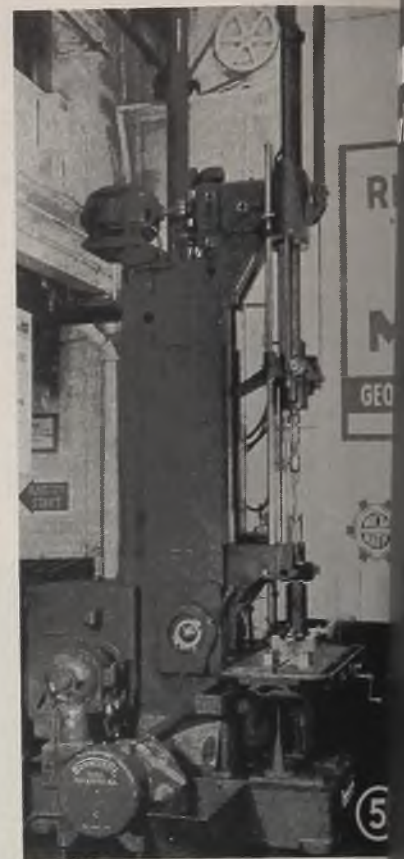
Vertical Barnes honing machine for large diameter honing, fitted with hydraulic size control or "fluid gaging" arrangement
